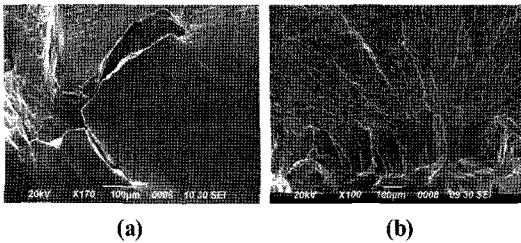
Fractograph of base metal fatigue specimens : (a) outer surface crack initiation, (b) crack propagation
